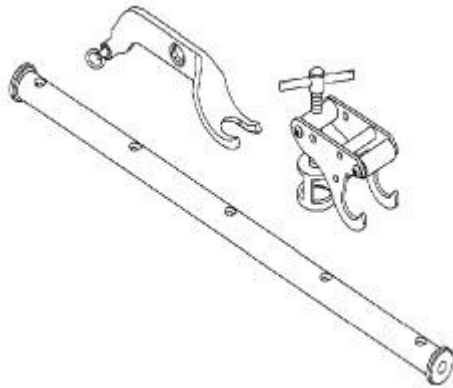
COMPRESSOR, VALVE SPRING - 9065A
